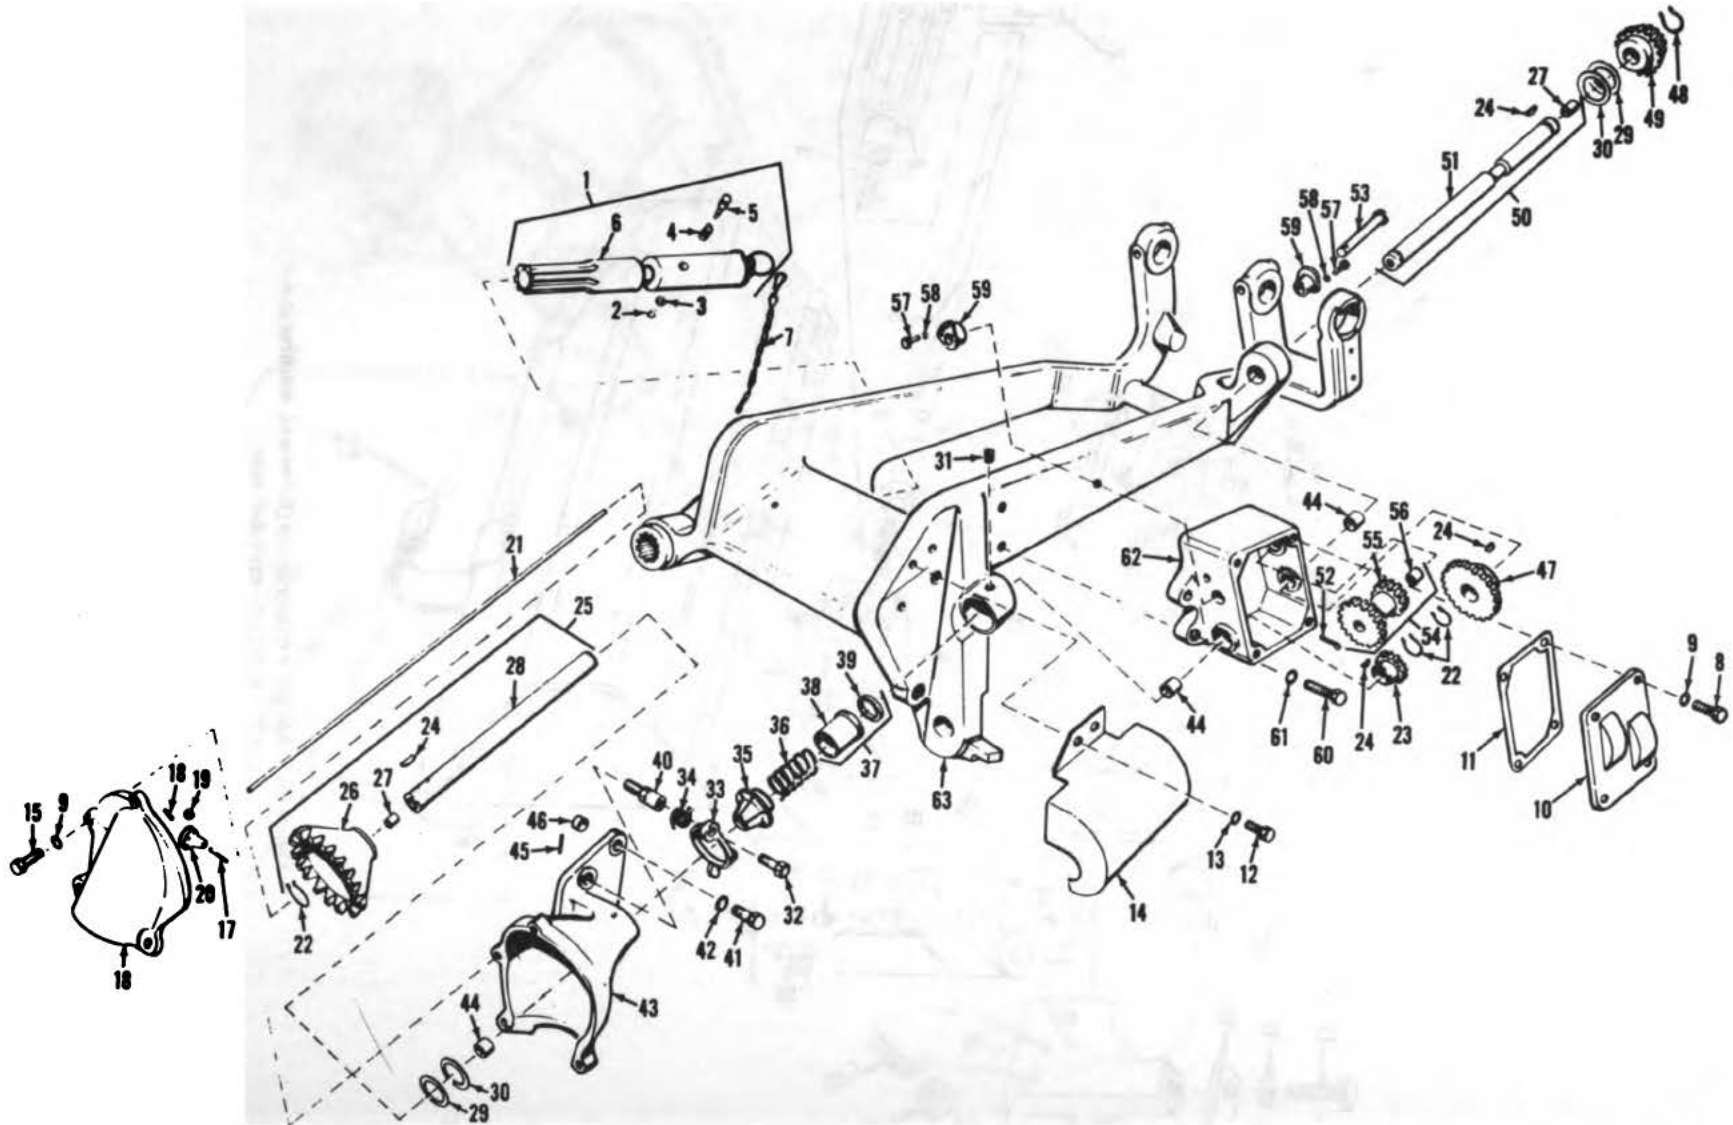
Lower mount machine gun (for mount, machine gun, 8346118)—exploded view.
